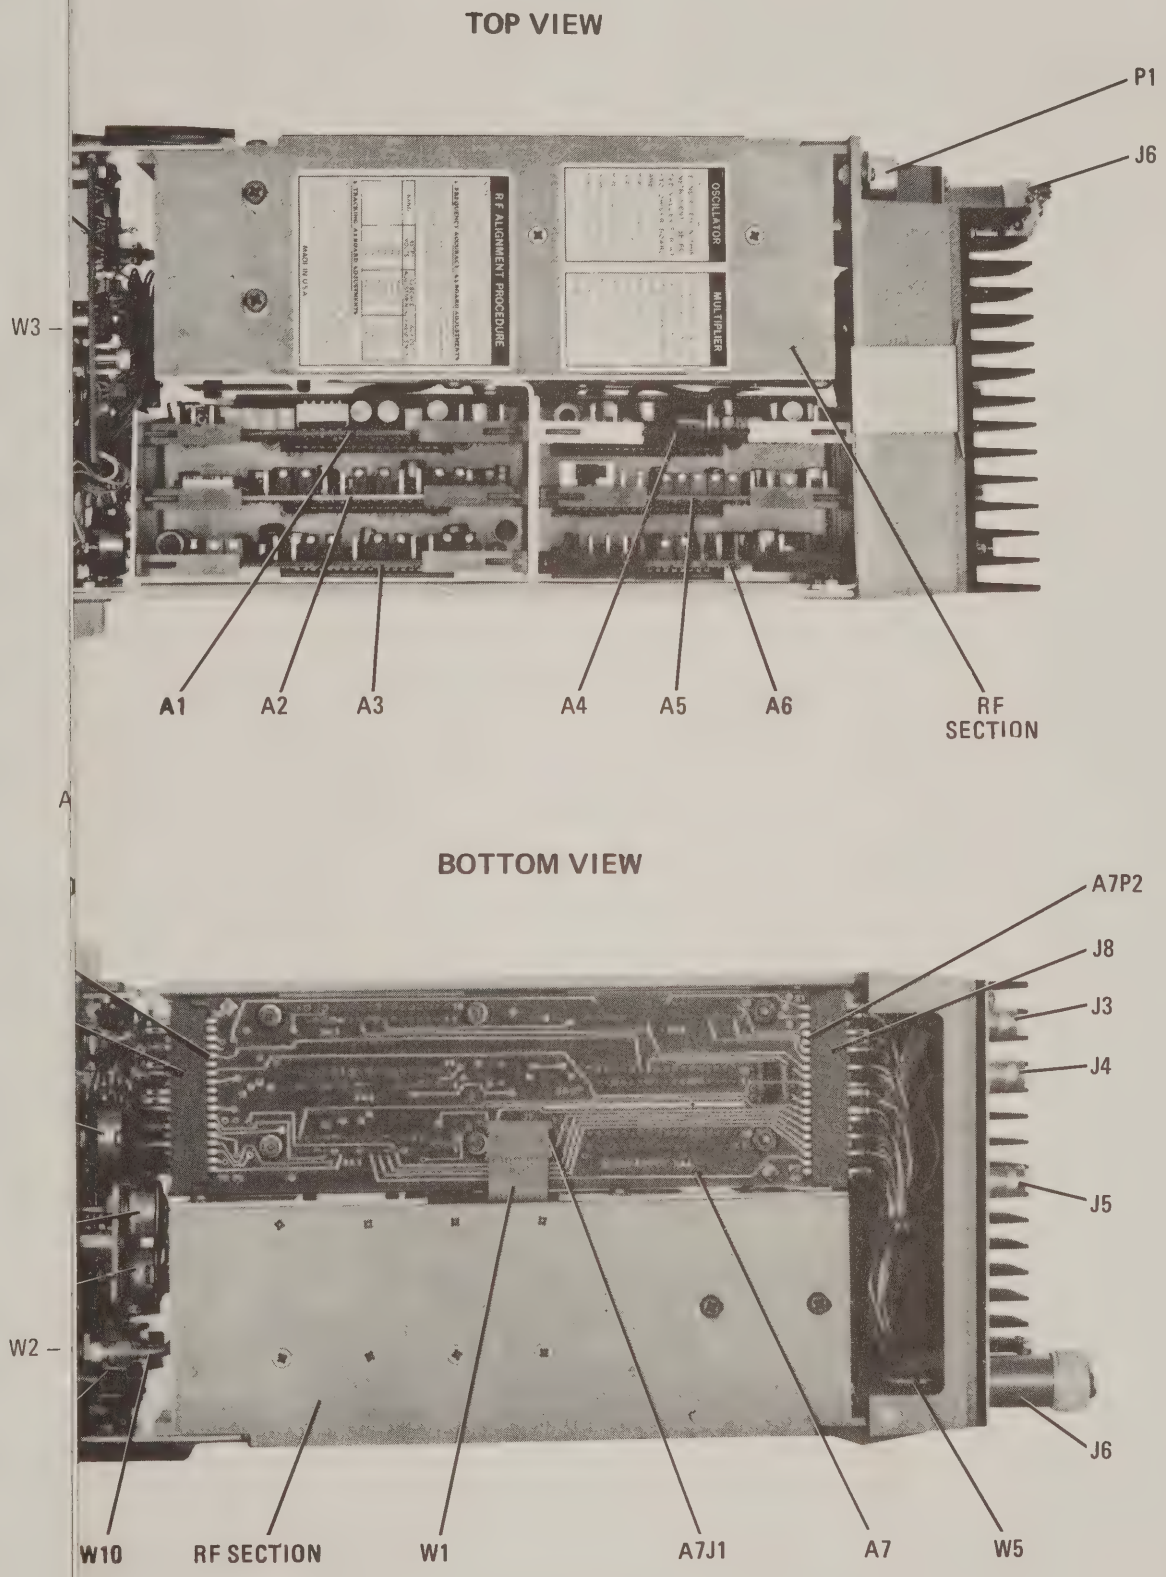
RF Section, Major Assembly and Component Locations, Option 004
